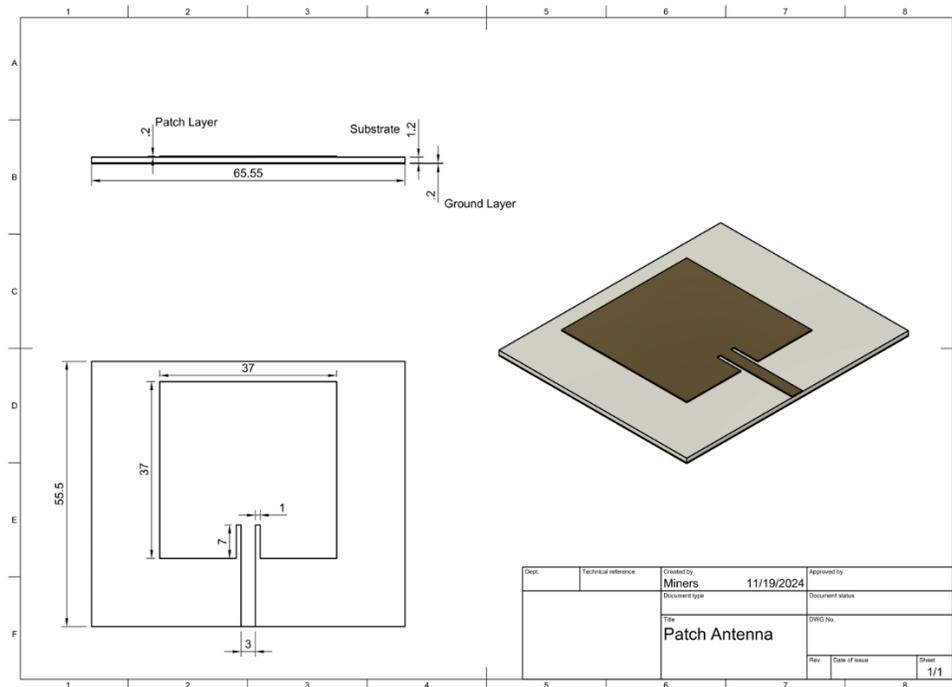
Drawings Of The Fully 3D Printed Patch Antenna Design [2]
